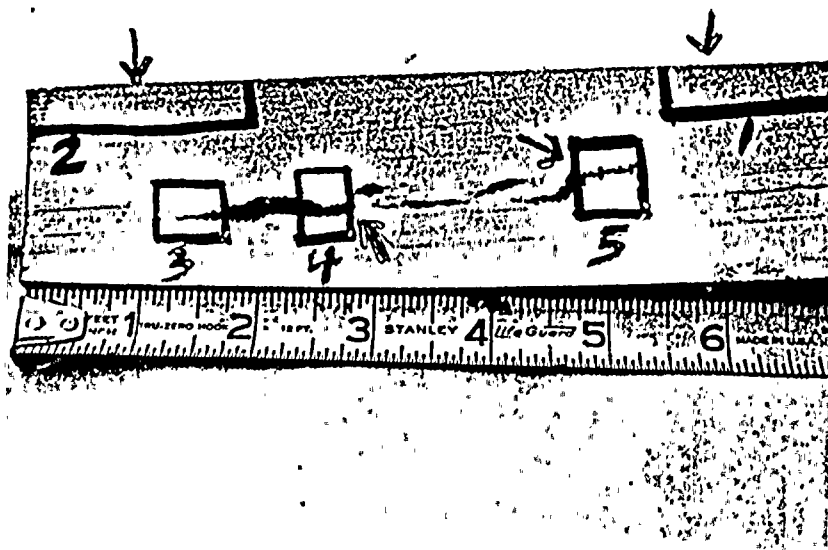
Pipe Inside, Penetrant Examined and Section Locations.
